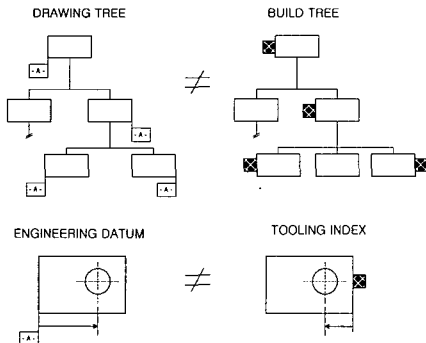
Drawing tree does not match with build plan and tooling index plan
